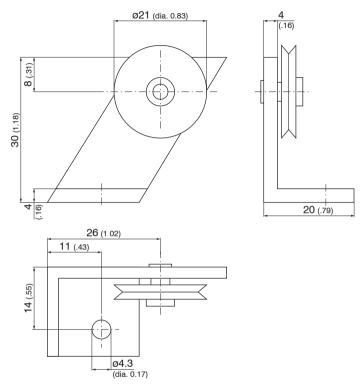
Guide pulley TR3-WPS fix with mounting socket, dimensions in mm (inches), not to scale
